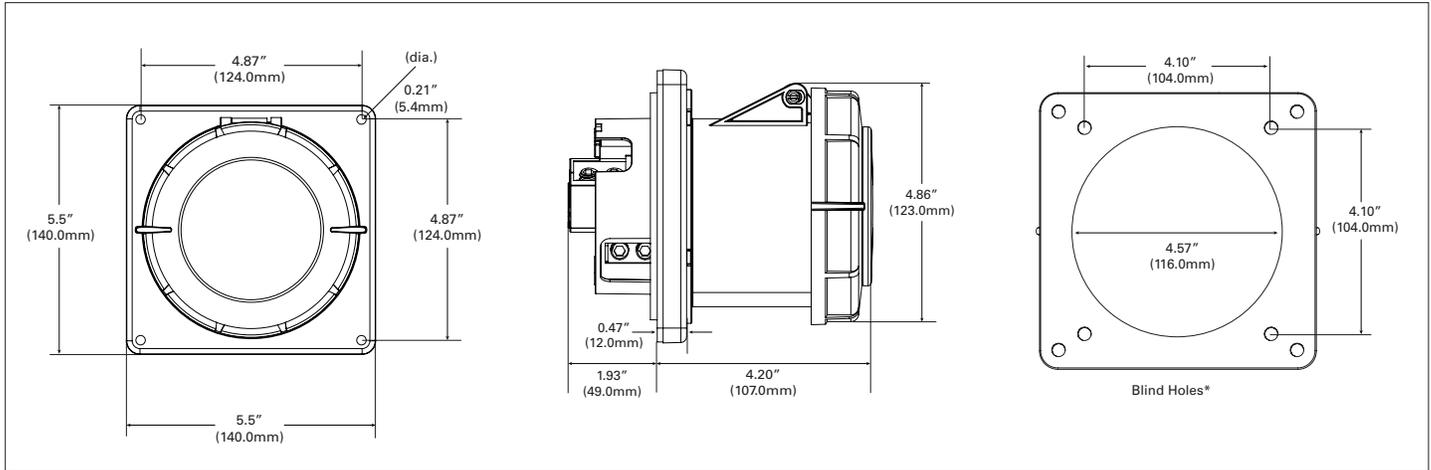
100A and 125A Receptacles, Front, Side & Back Views
